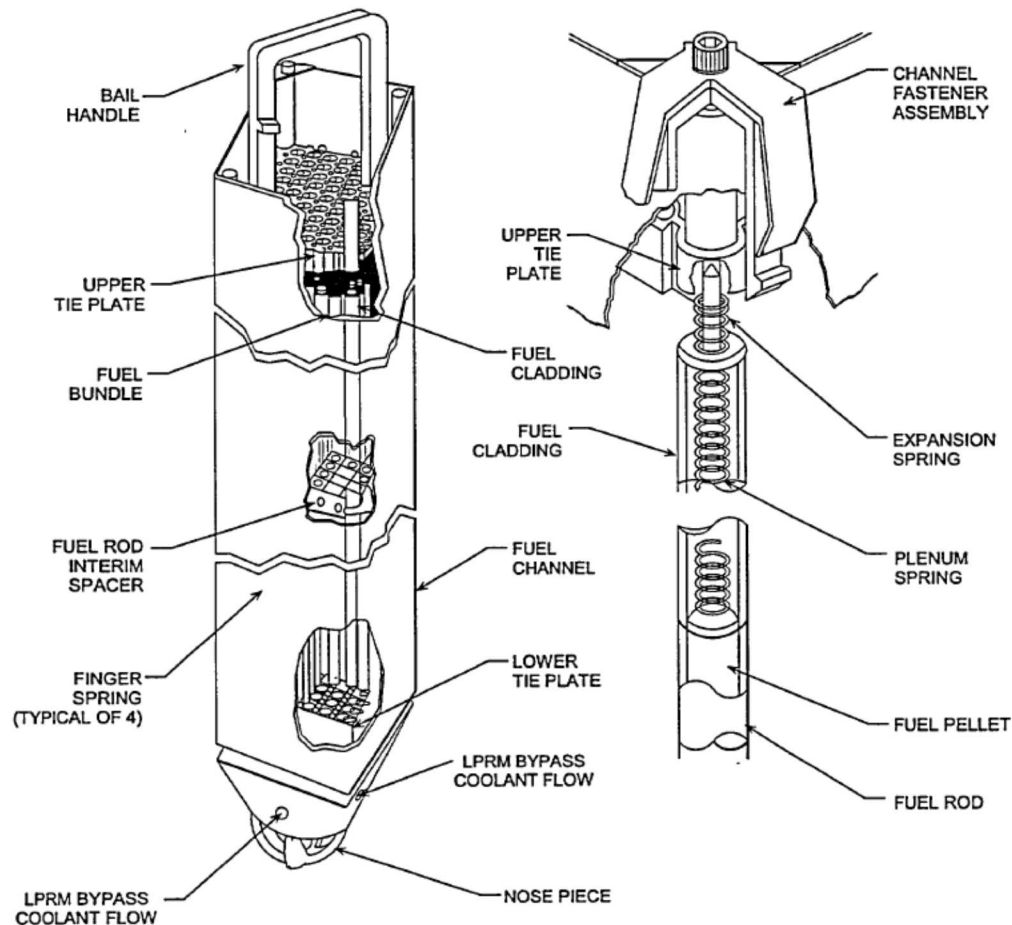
BWR fuel assembly schematic showing fuel channel and channel fastener (Figure 2.2-1 from NRC 2006).
